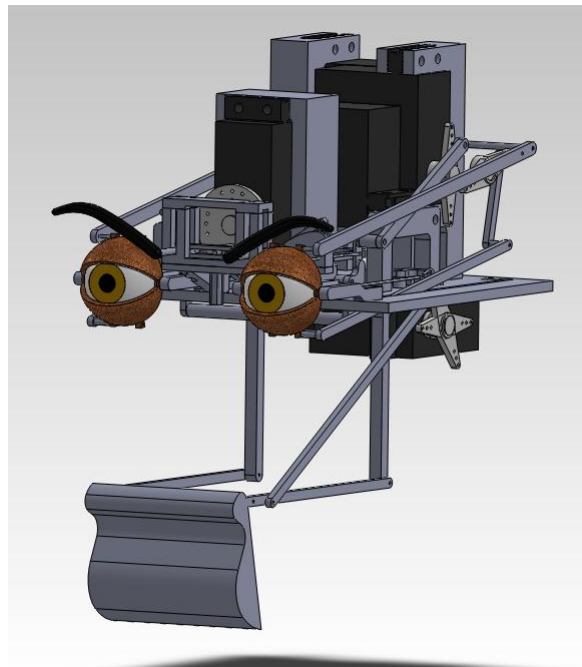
Assembly with Eyebrow, Eye Yaw, Eye Pitch, Eyelid, and Jaw Subassemblies
